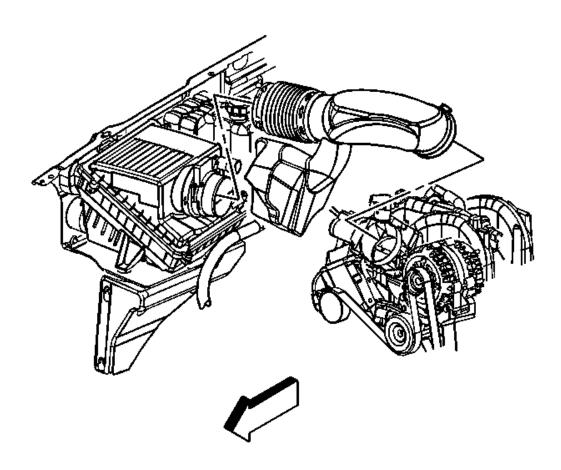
View Of Air Cleaner Outlet Duct Courtesy of GENERAL MOTORS CORP.
